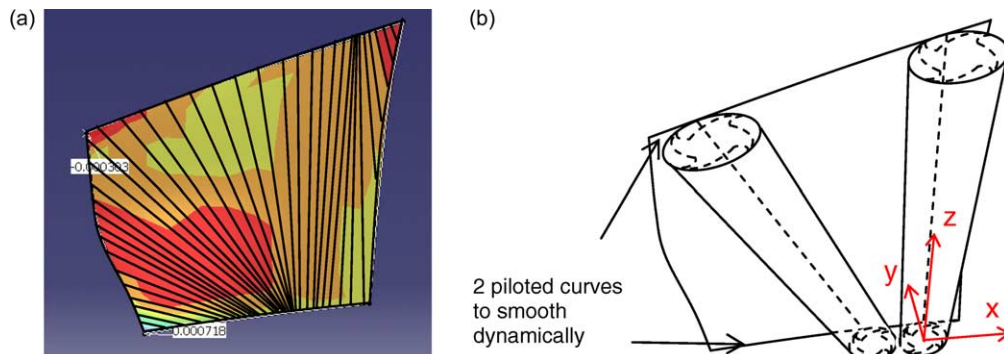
Tool path generation for five-axis flank milling of impellers.
